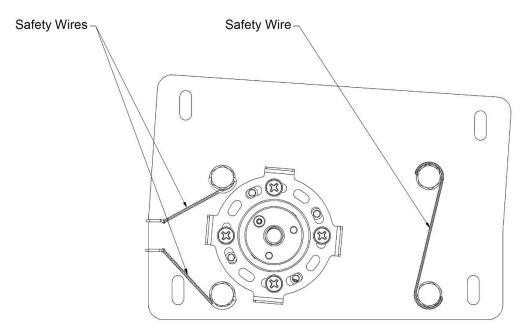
Safety Wiring Roll Servo Bolts (Example)
